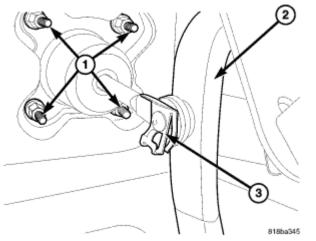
Identifying Retainer Clip, Pedal & Booster Mounting Nuts Courtesy of CHRYSLER LLC
